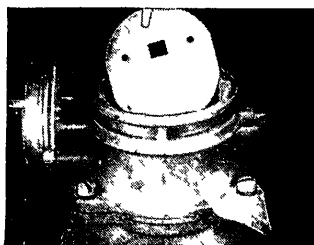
Install choke valve. Start choke valve by tapping lightly
